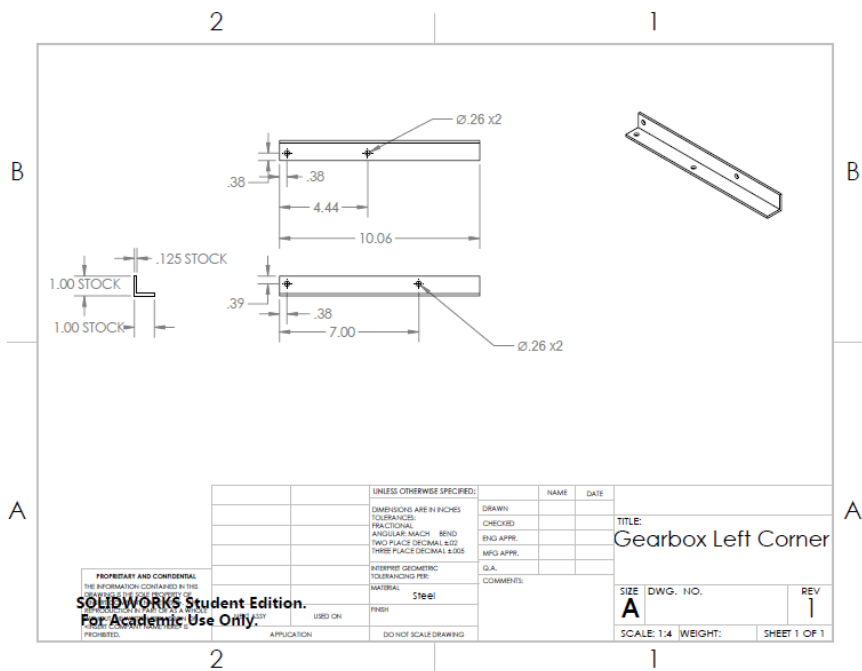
Gearbox Left Corner Drawing. Revised: See Appendix E.3
